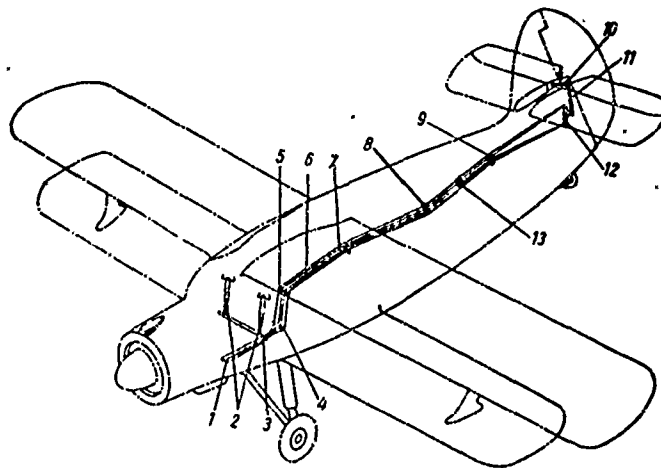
Diagram of elevator control: 1 - rollers at frame No. 1; 2 - control column; 3 - hand control levers; 4 - lower rollers on frame No. 5; 5 - upper rollers on frame No. 5; 6 - cables; 7 - rollers on frame No. 8; 8 - rollers on frame No. 15; 9 - rollers on frame No. 21; 10 - elevator lever; 11 - rod; 12 - actuator on frame No. 25; 13 - clamps.
